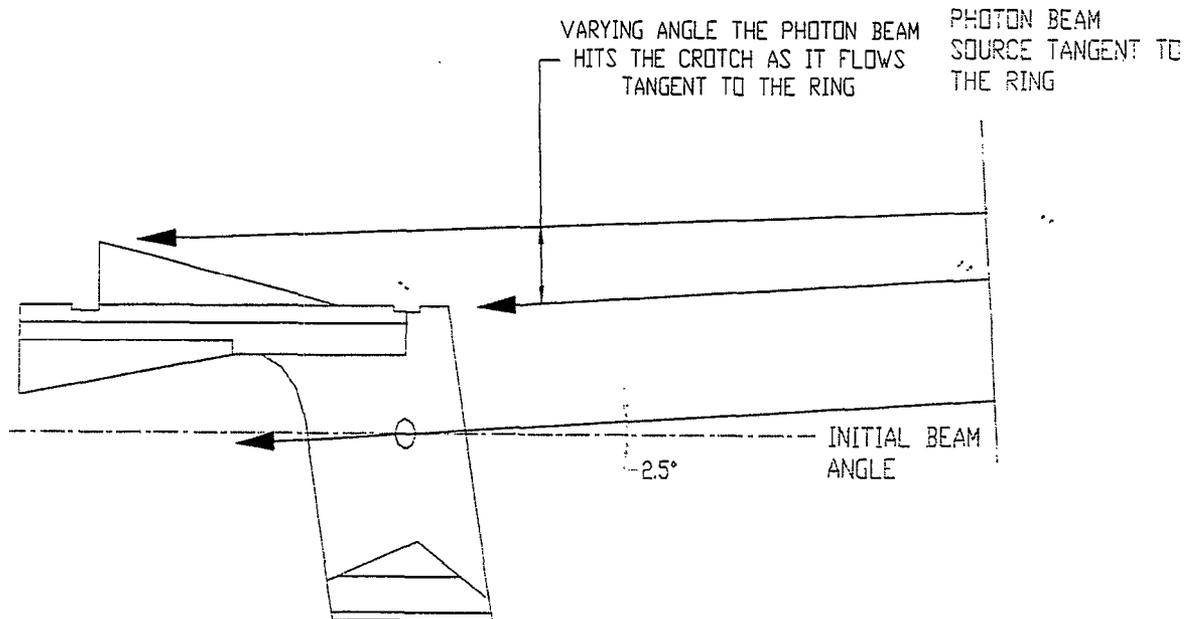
PHOTON BEAM PROFILE ON CROTCH
